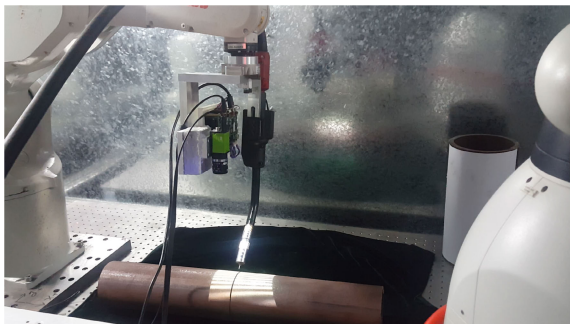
The camera-projector rig-based welding system in a real scenario.
